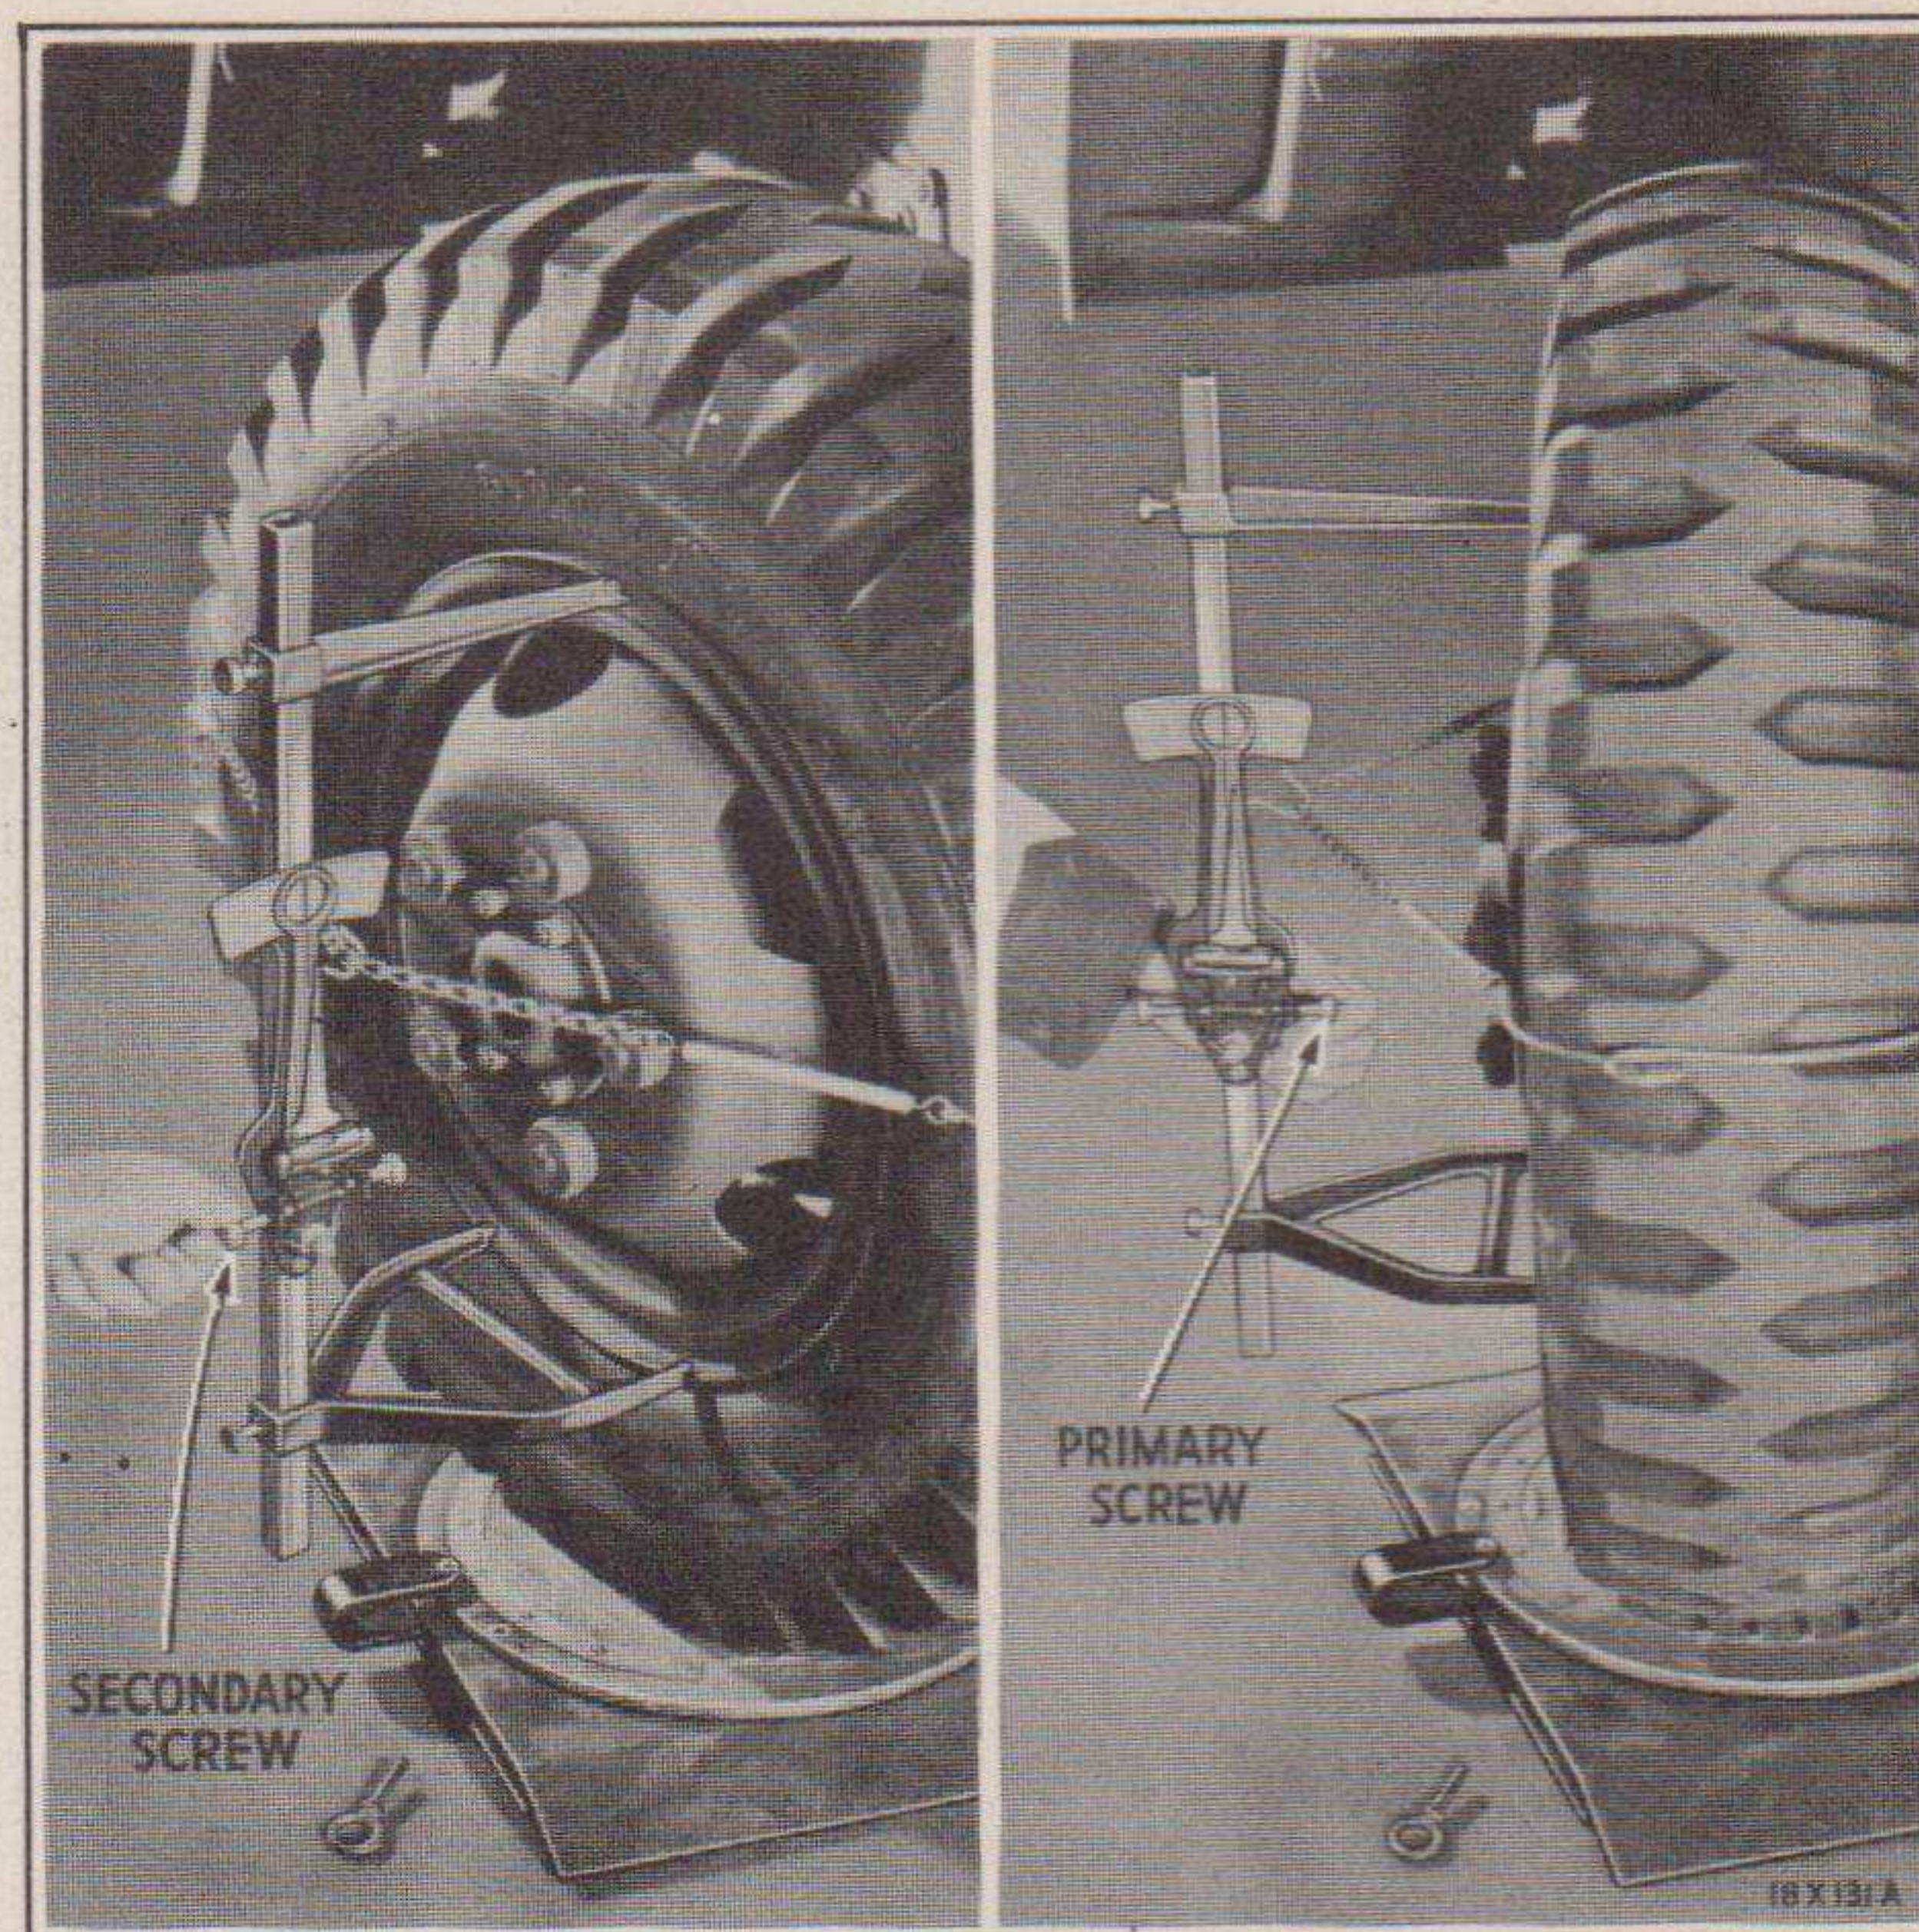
Checking Caster—Gauge on Right Wheel (Gauge Tool DD-428)
